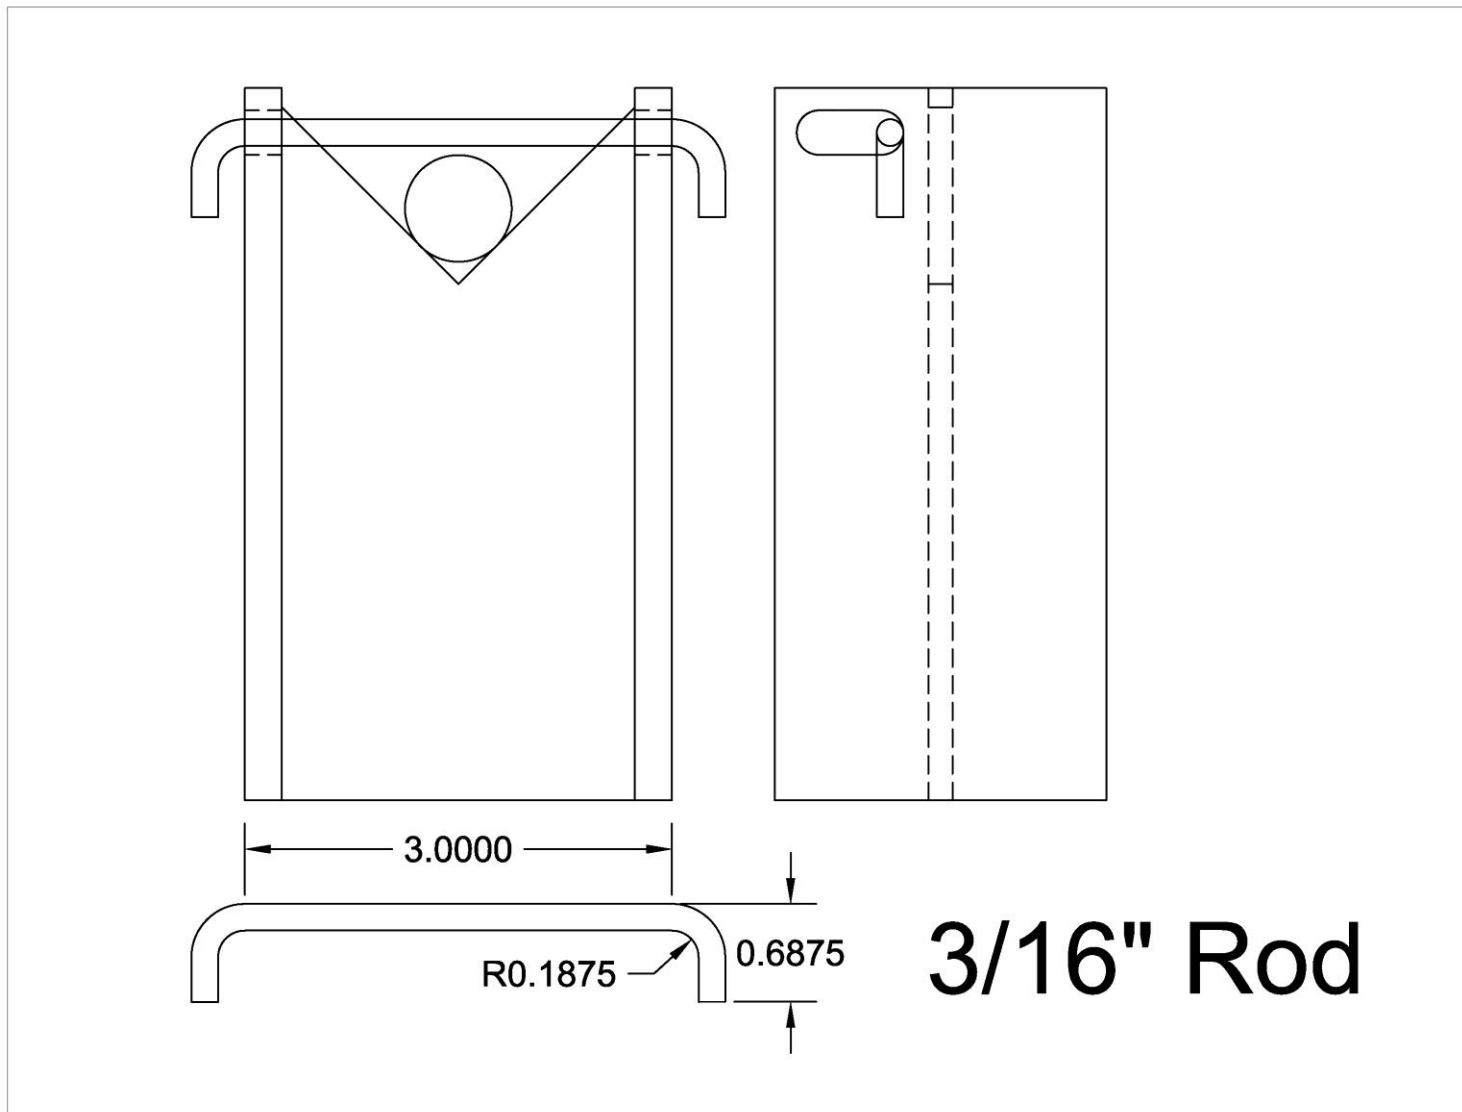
3/16 in. (4.8 mm) Diameter, Straight Rod with Bent Ends Detail
